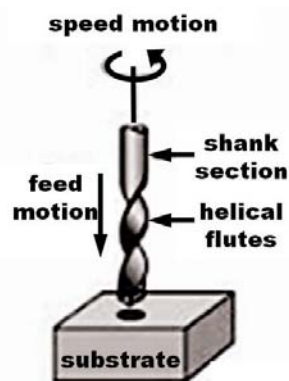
Principle of drilling process: rotating drilling tool creates a hole by penetration of the substrate in parallel direction to its axis of rotation. [adjusted picture originally from: Groover, 2010].
